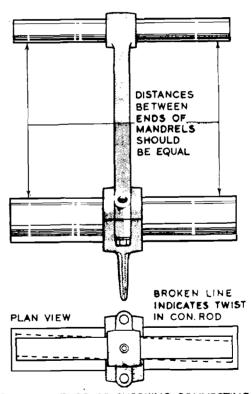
A METHOD OF CHECKING CONNECTING ROD ALIGNMENT BY THE USE OF MANDRELS.
